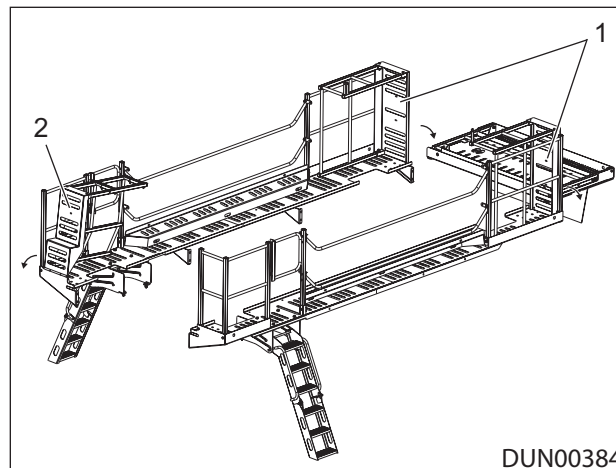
Maintenance Platform Handrail Sections in the Transport Position
